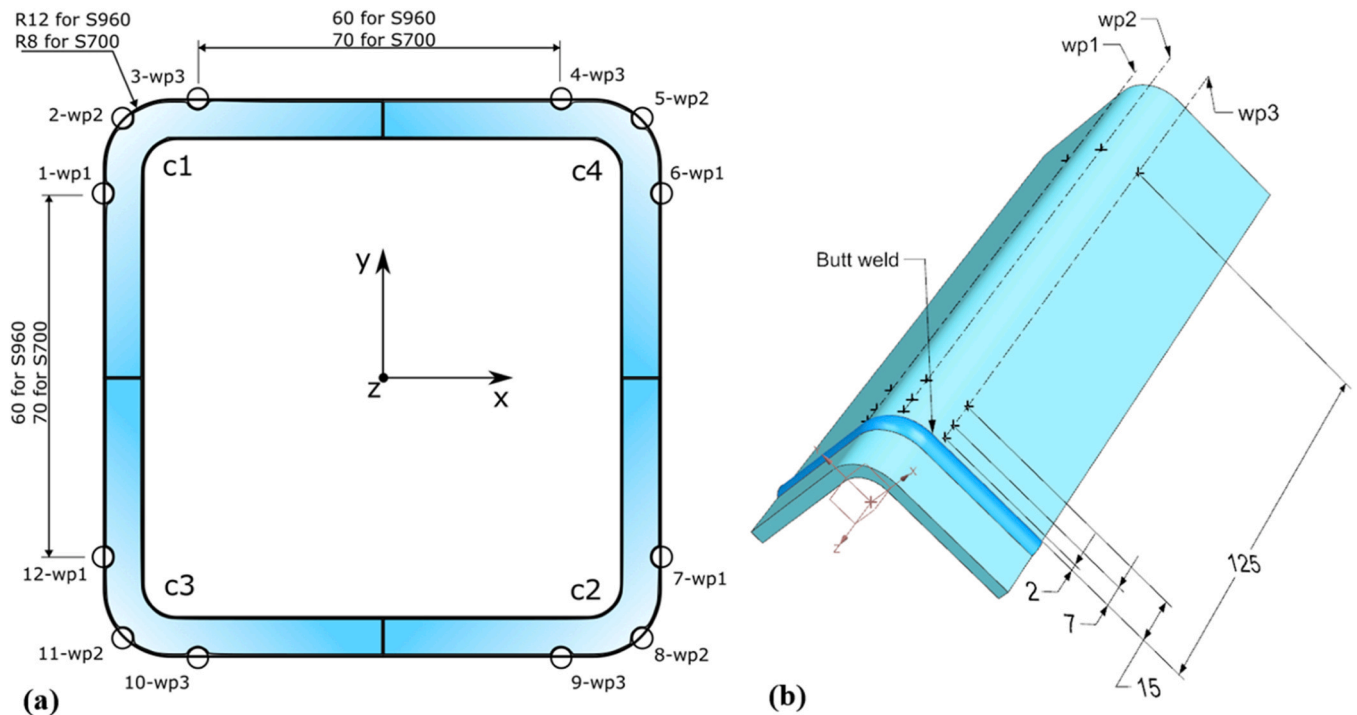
Measurement points and welding points (wp) at different distances from weld (a) and measurement points of one tube corner with distances from butt-weld, where 125 mm corresponds to the unwelded base material of the rectangular hollow section (b).
